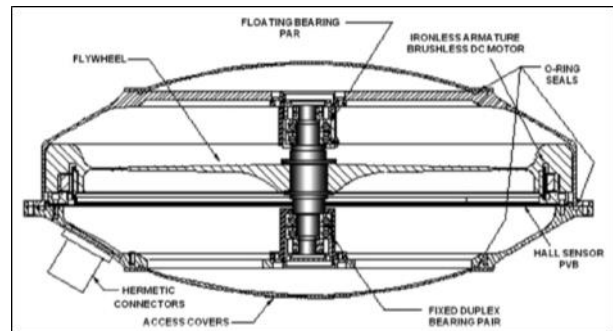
Cutaway Drawing of a Typical RW Showing Shaft-Mounted Flywheel [16]
